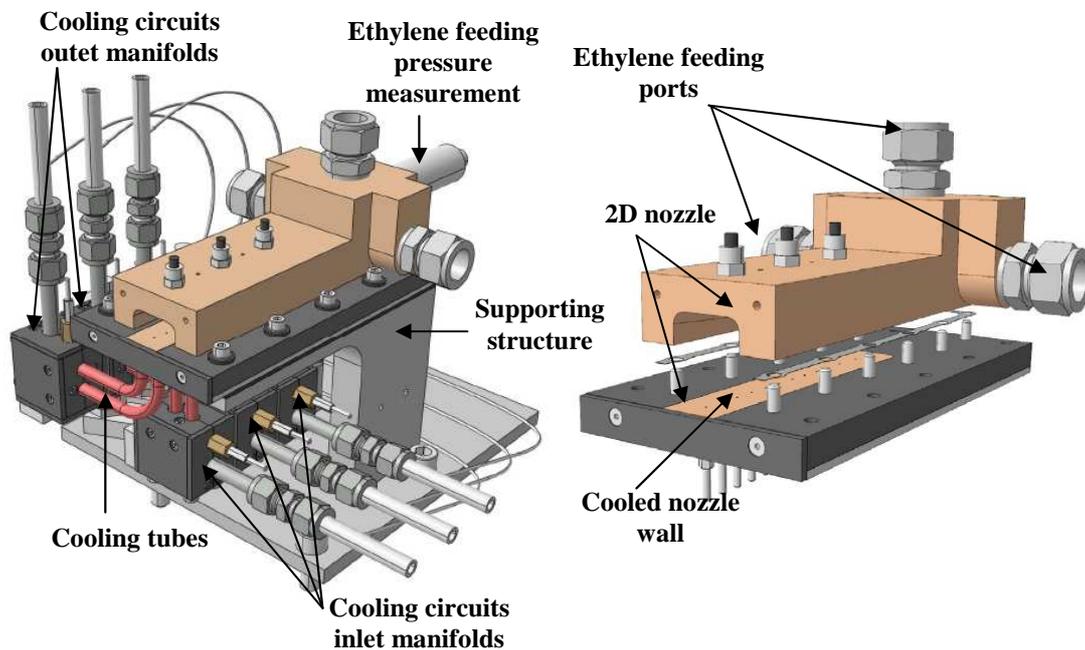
Full hardware assembly overview and exploded view of chamber assembly
